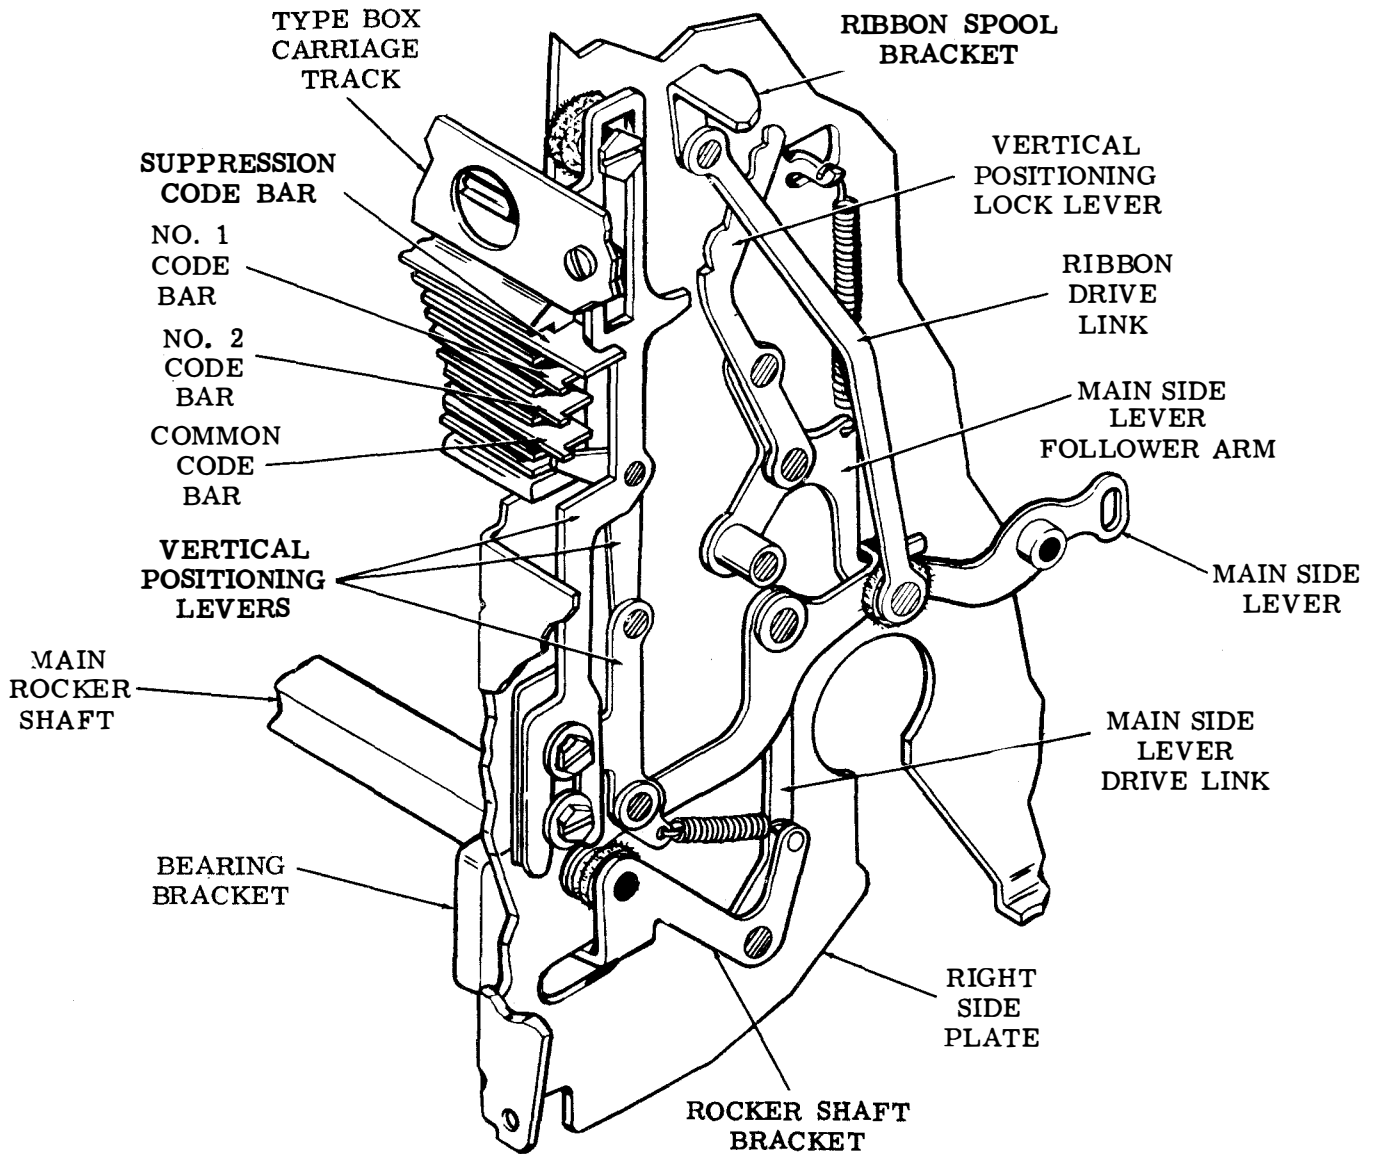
Vertical Positioning Mechanism, Right Front View
